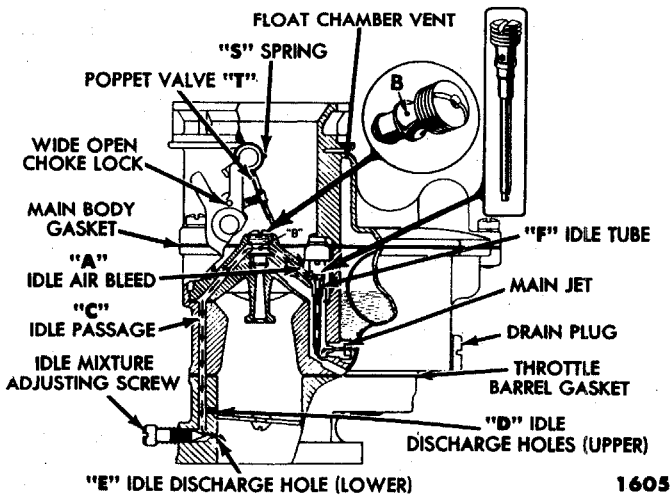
8-Cylinder Carburetor Idle Fuel System
